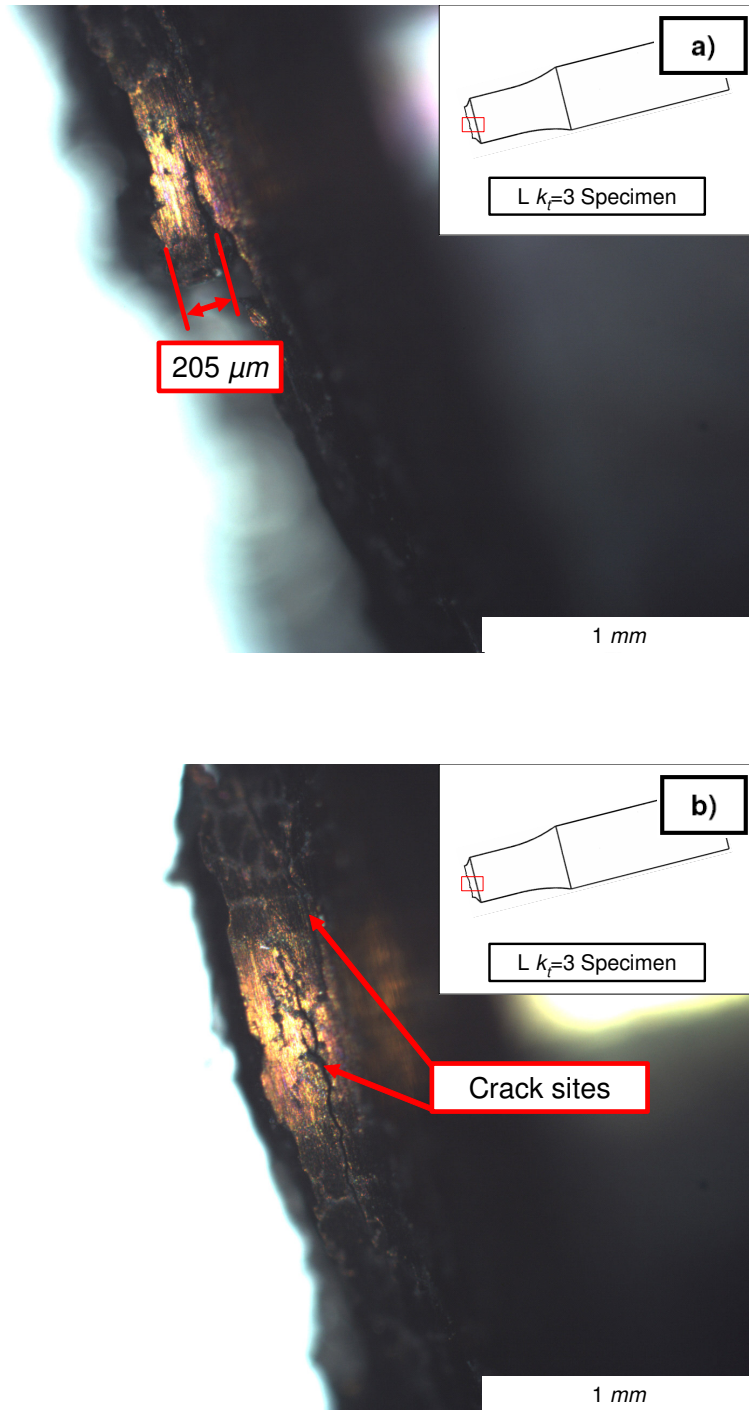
Fracture surface of a longitudinal $k_t=3$ specimen.
